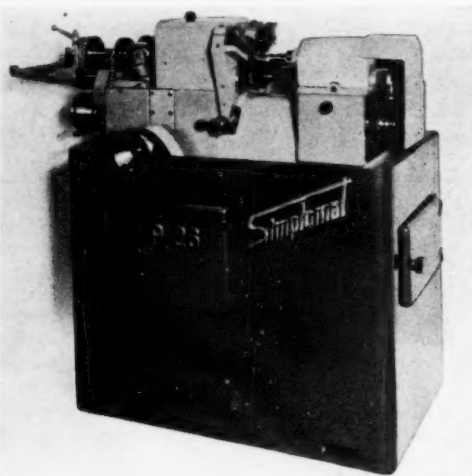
Pongracz Simplomat Single-spindle Automatic Screw Machine
